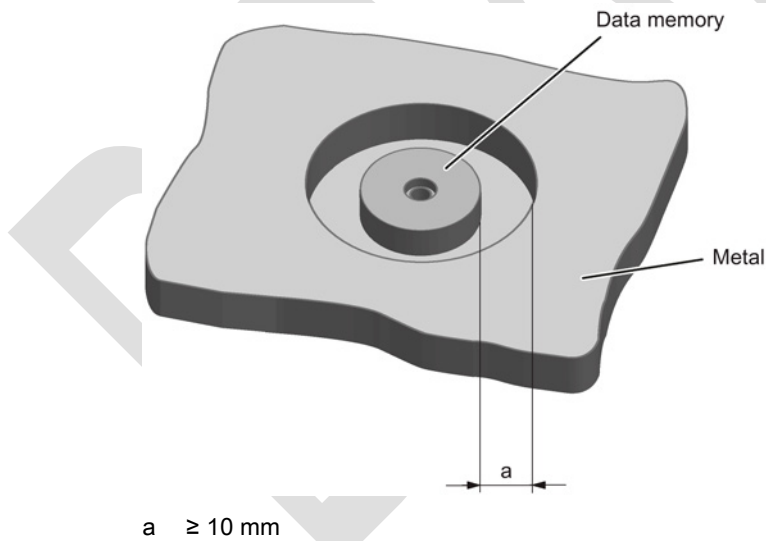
Flush-mounting of the MDS D423 in metal with 10 mm clearance
